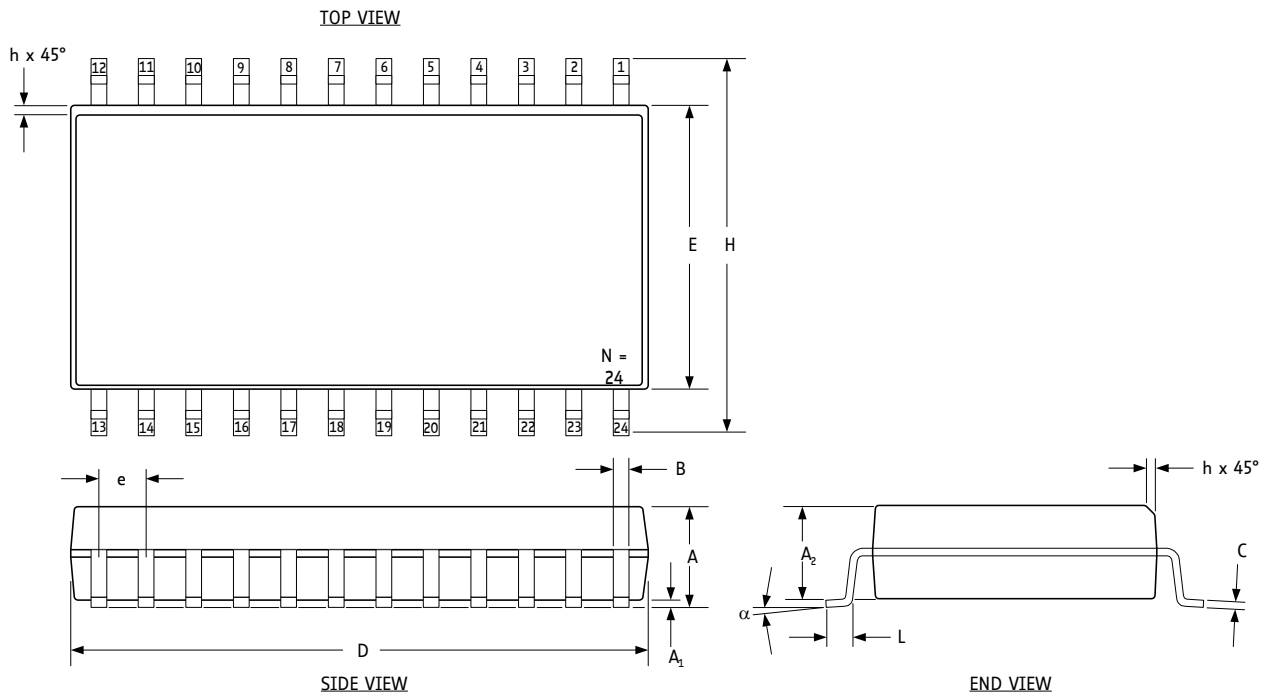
Dimensional drawings SOP24, 300 MILS
